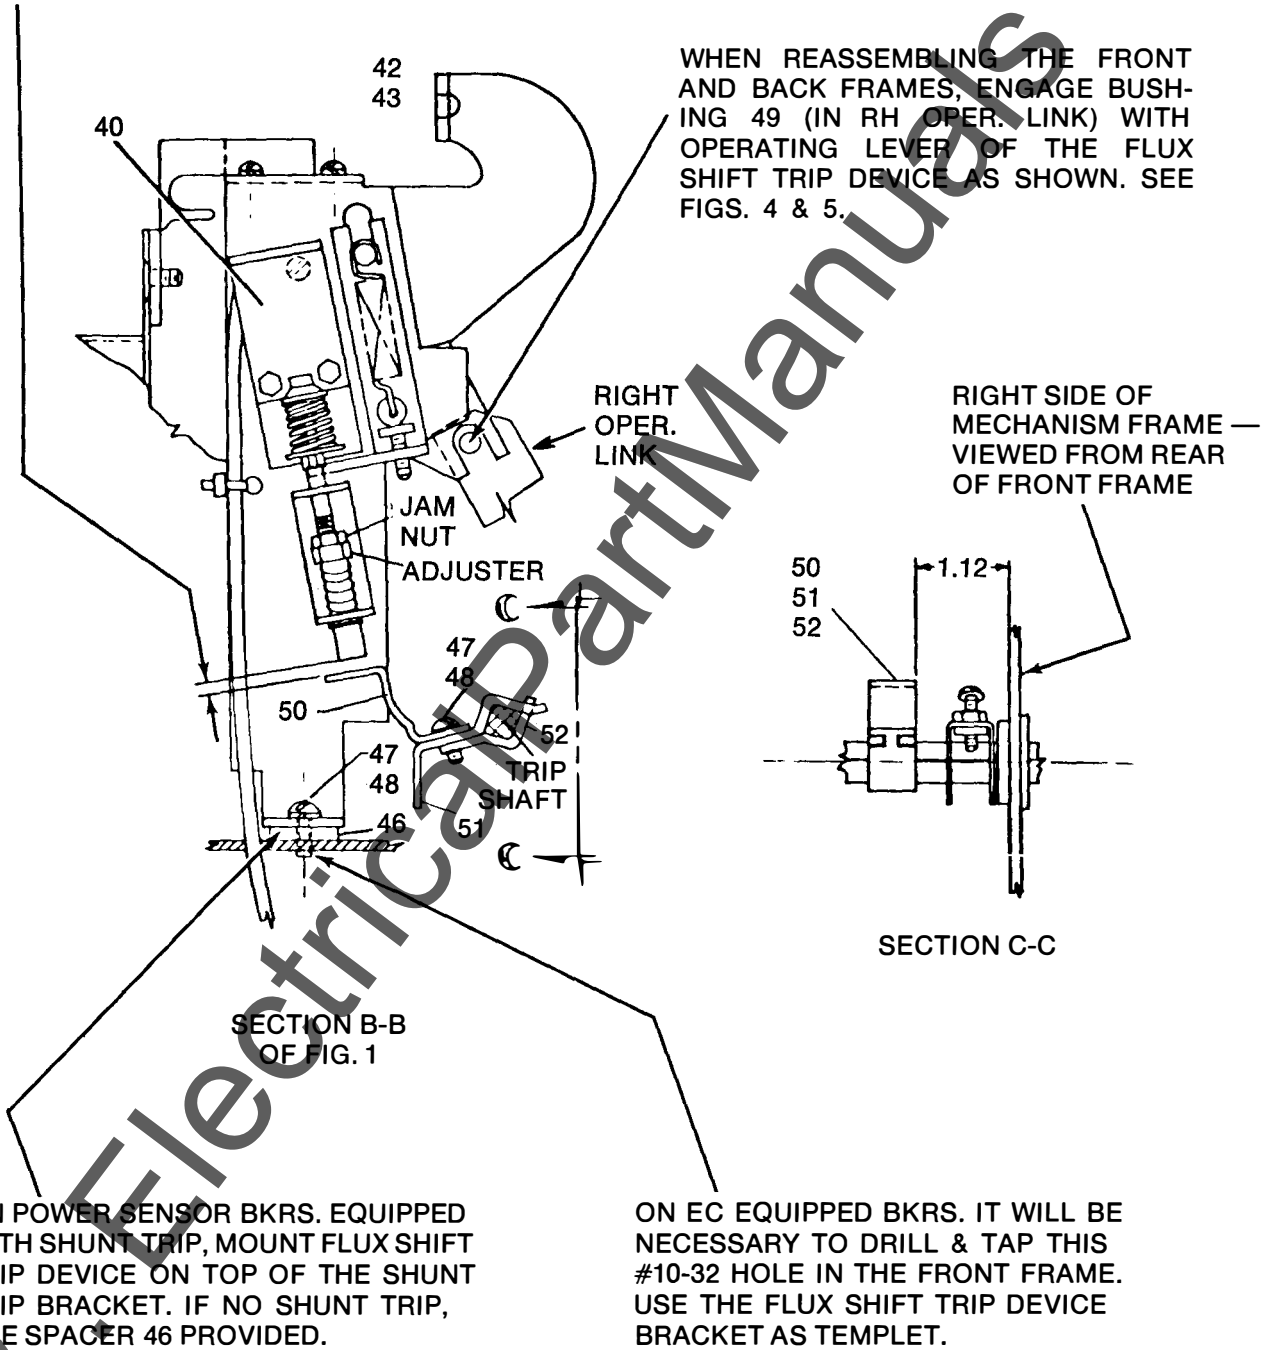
Right side view of mechanism frame showing mounting of flux shift trip device 40.
